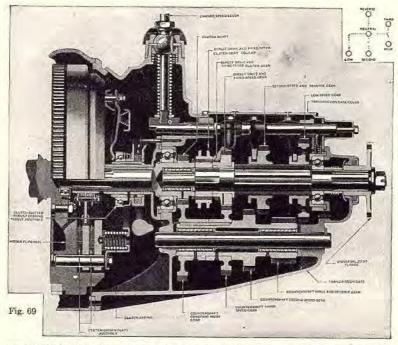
Packard clutch and transmission. Fig. 70 (top right-hand corner). Packard gear shift.
